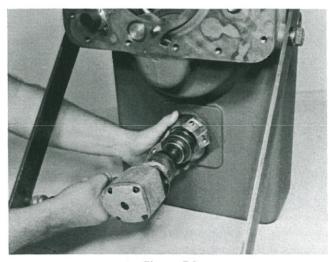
Remove output shaft front flange nut, washer, "O" ring and flange.
